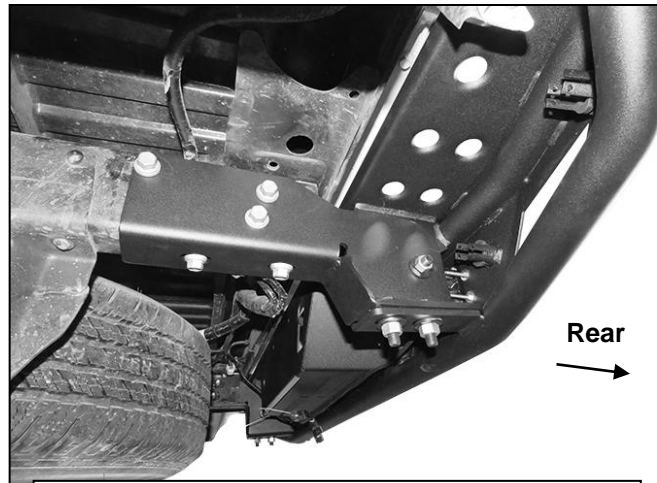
Models without factory receiver hitch: Attach Bumper to side and bottom of Mounting Bracket
